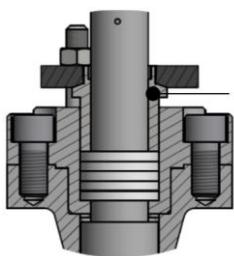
Type 82.7, DN 150 (stuffing box without O-rings)
